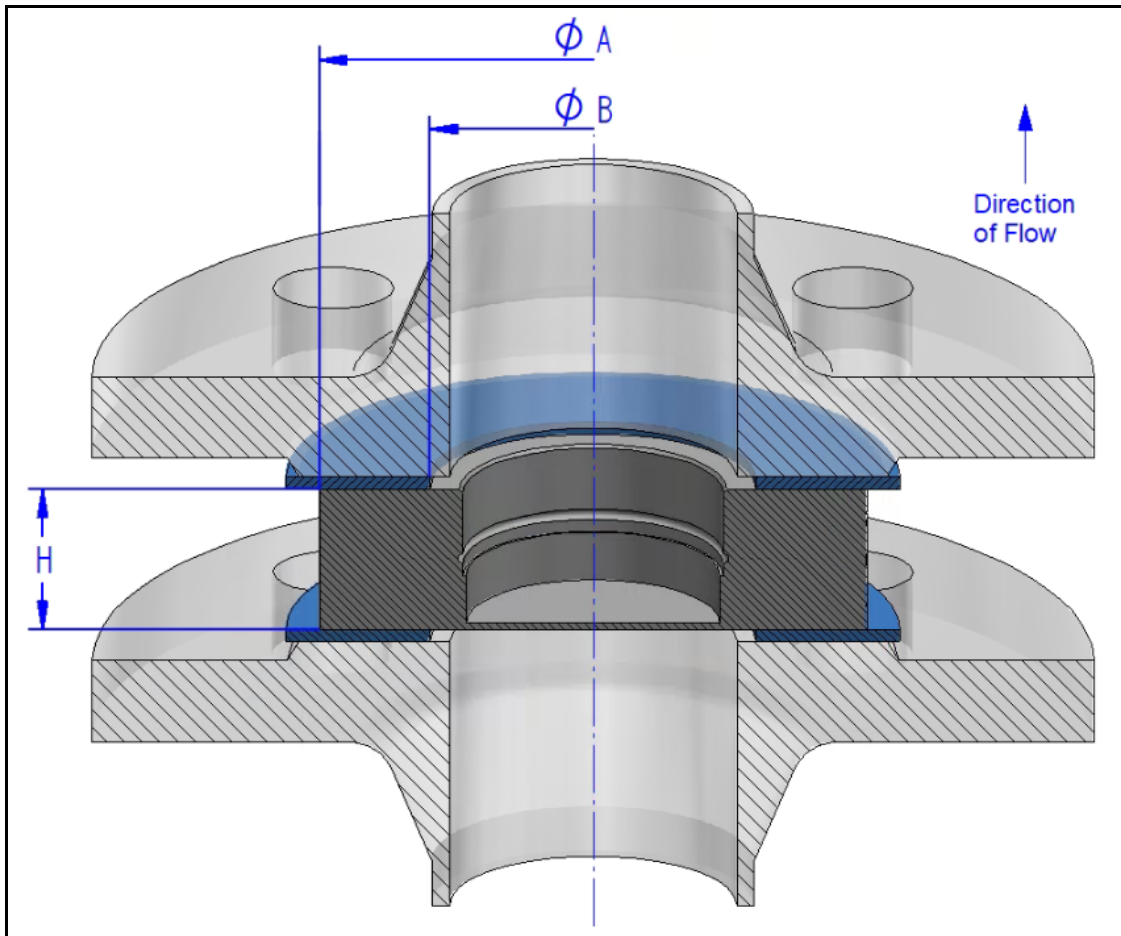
Dimensions GRX[®]-UK for installation between flanges
